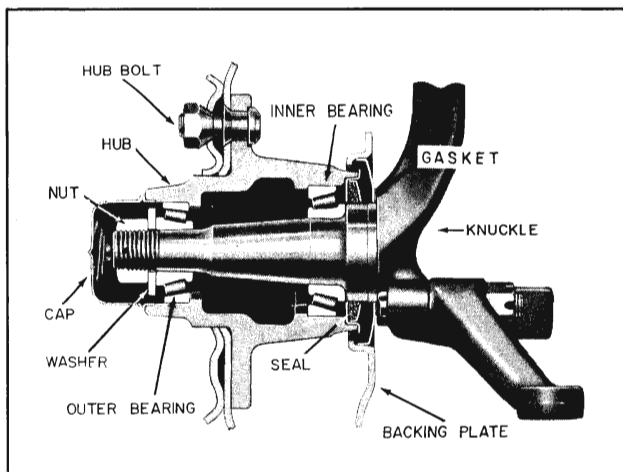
Steering Knuckle and Hub Assembly (Right Front Shown)
